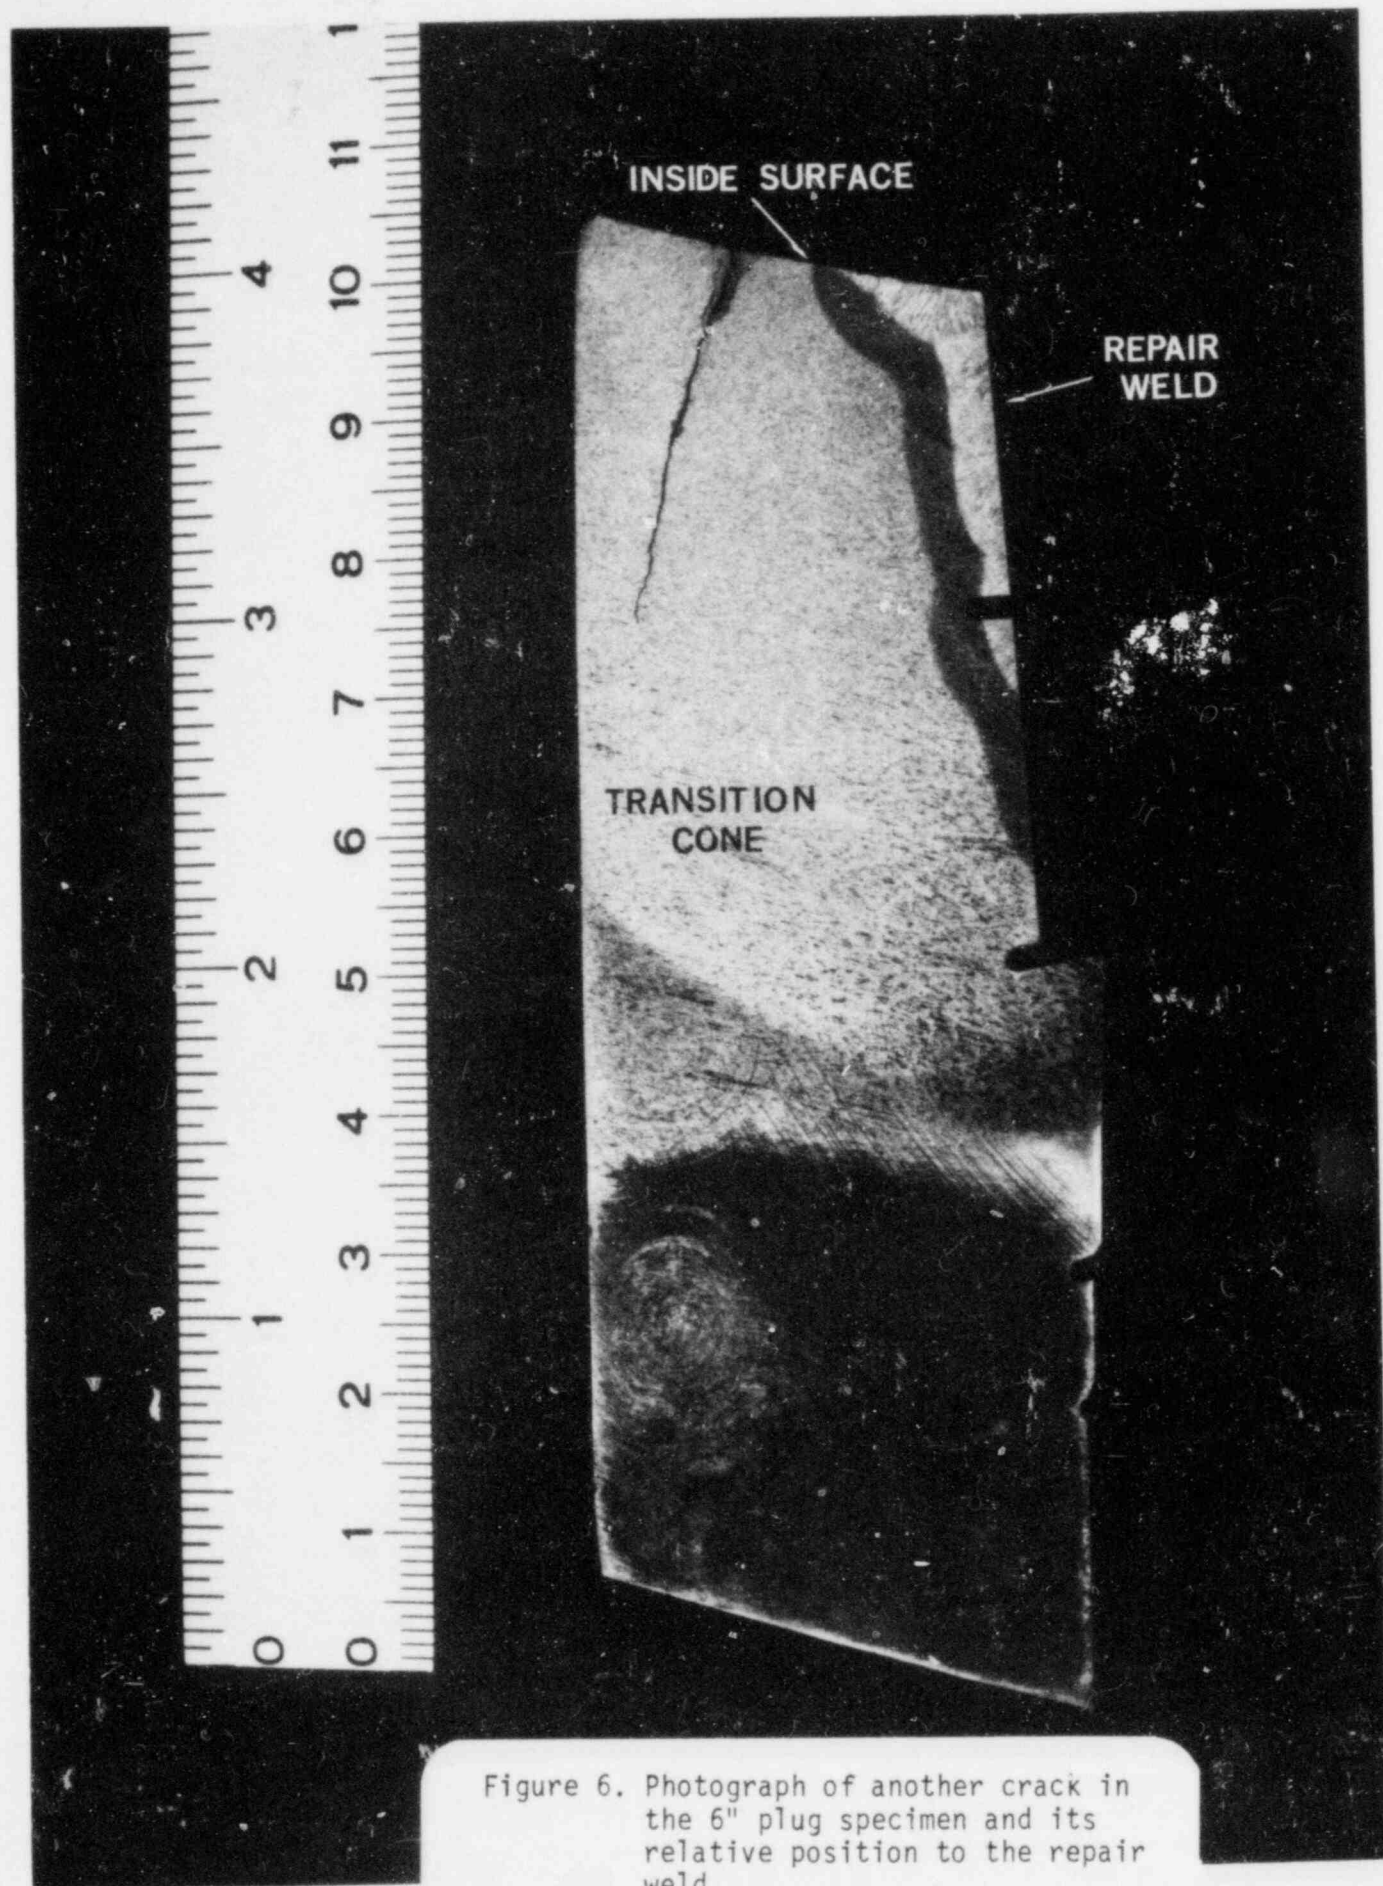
Photograph of another crack in the 6" plug specimen and its relative position to the repair weld.
